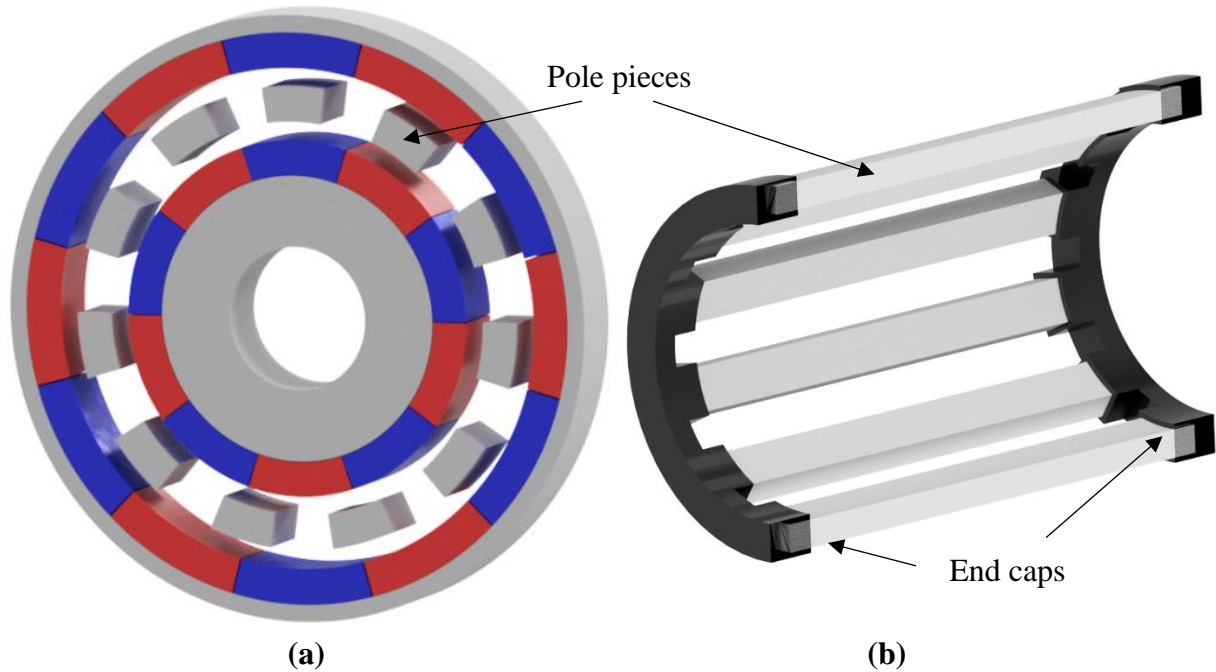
Caged modulation ring – (a) Section view of gear assembly, (b) Axial section of pole assembly illustrating ends caps connecting self-supporting pole pieces
